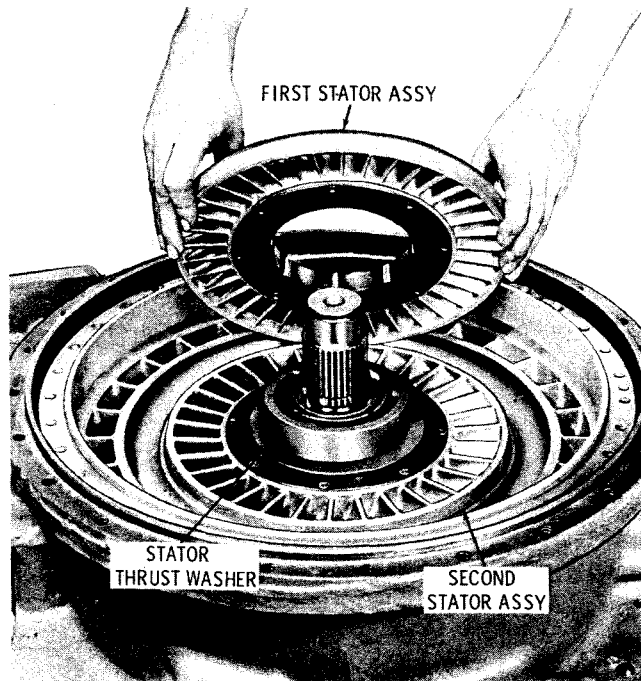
Removing first-stator assembly (5630, early 5631 models)
